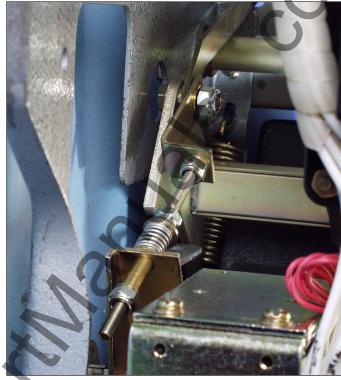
Reset Rod Assembly Mounted in the Breaker
